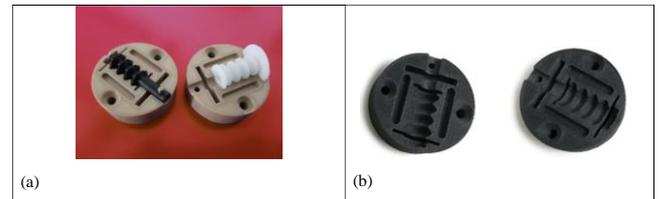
(a) 3D printed PEEK mould insert with moulded parts still in the mould.
